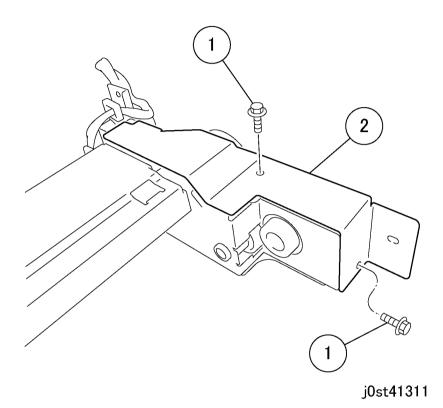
Removing the Tray 3 Feeder (j0st41311)
